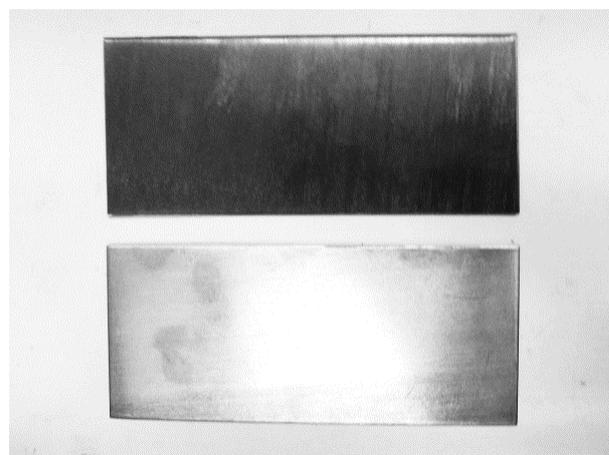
Cu/SS clad sheet; Top: steel side, Bottom: copper side
